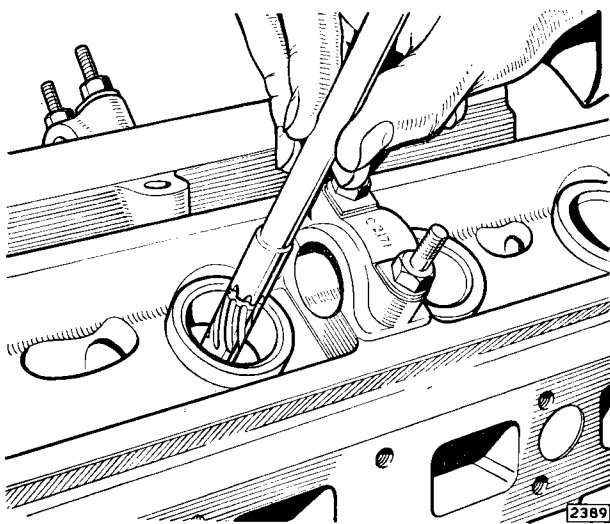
Reaming the bores in the cylinder head with Churchill tool number J.18 to take service replacement valve guides
